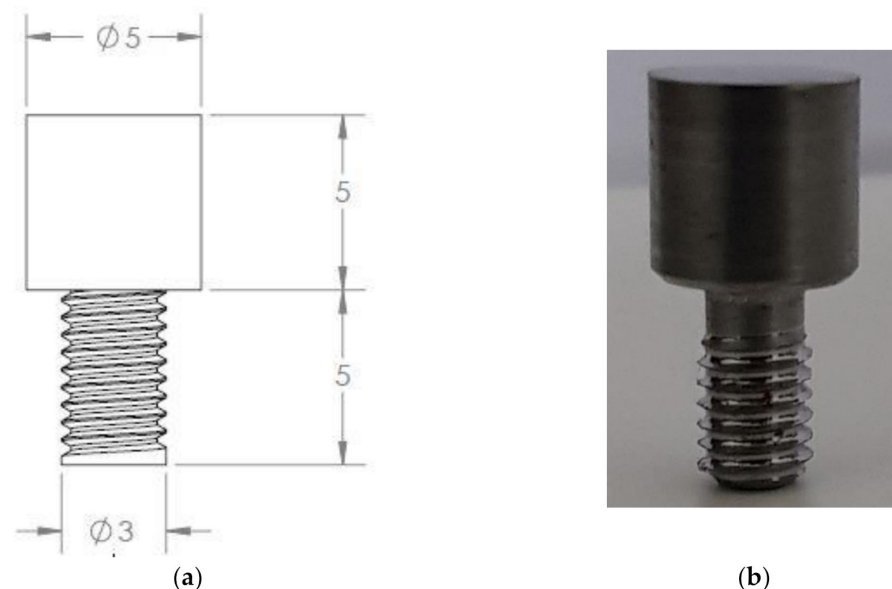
API 5L X65 specimen for corrosion testing (a) CAD Model, (b) actual sample.
